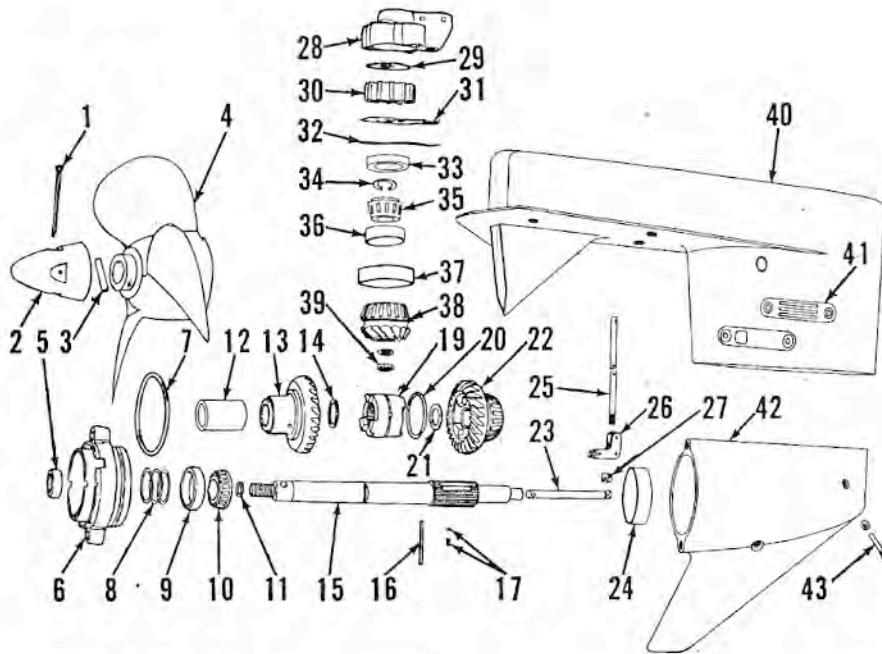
Exploded view of lower unit gearcase, drive shaft housing and associated parts.
